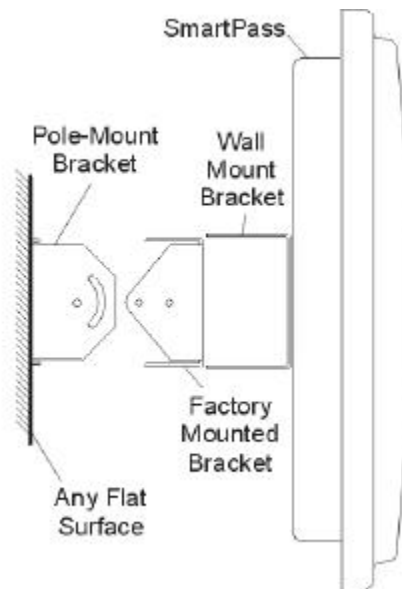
Connecting SmartPass Assembly to Pole Mount Bracket
